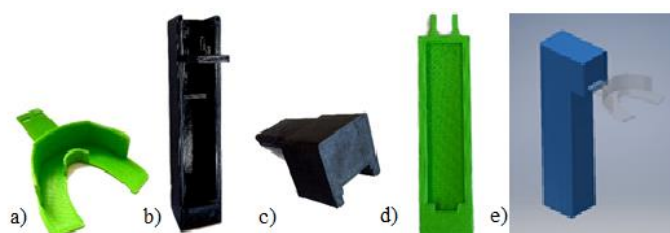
Printed parts: teether a), body b), upper cover c), battery cover d), general view of device e)
